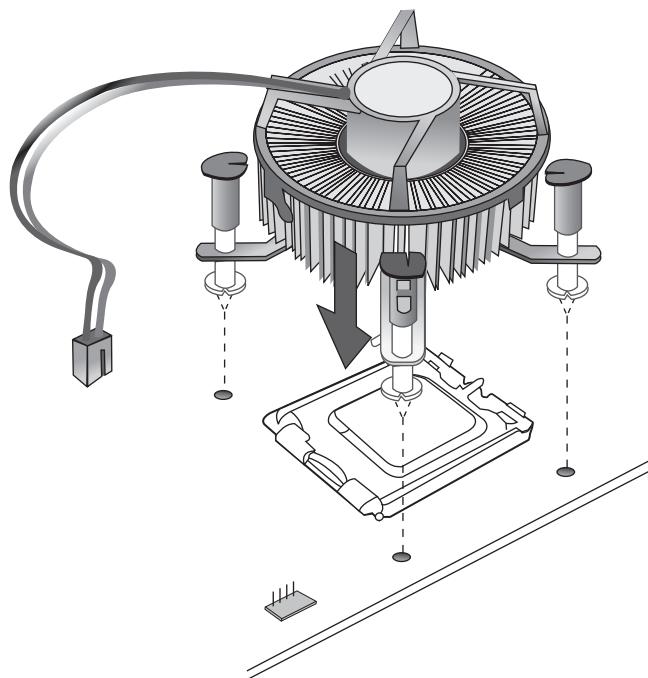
Four spacers on the cooler pop into each hole on the motherboard
